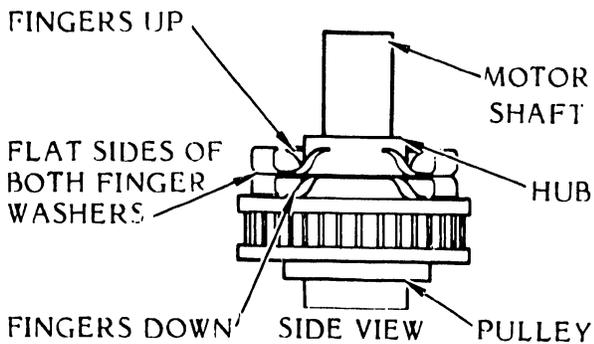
Ribbon Drive (Posidrive) Slip Clutch Removal/Installation
